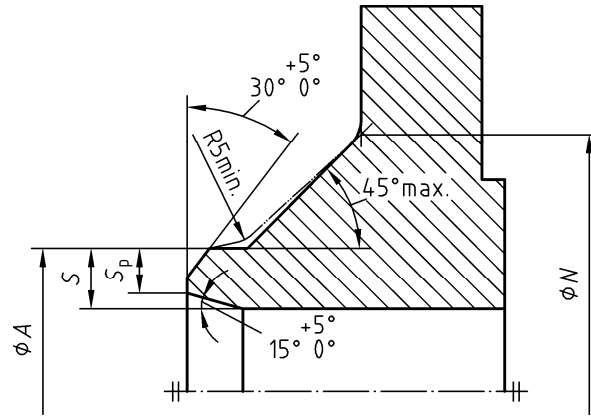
Welding end connection for wall thickness $S \geq 22$ mm
